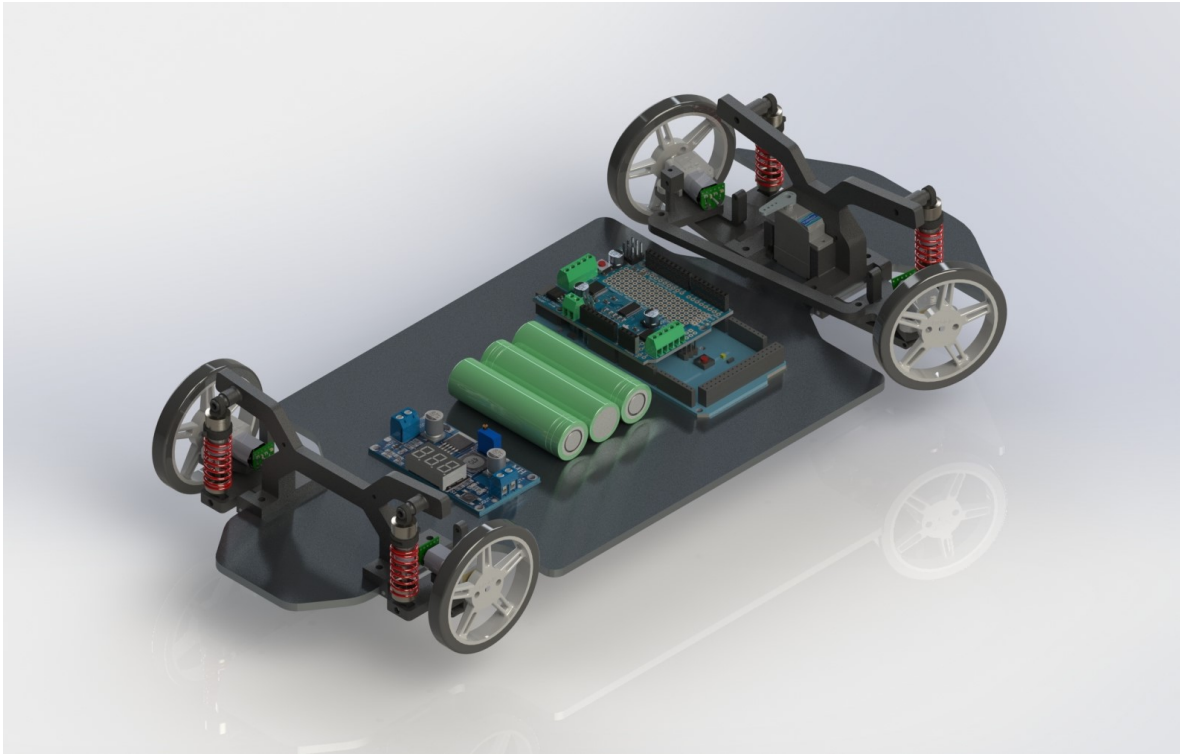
3D CAD render of the scale model assembly made in *Solidworks*.
